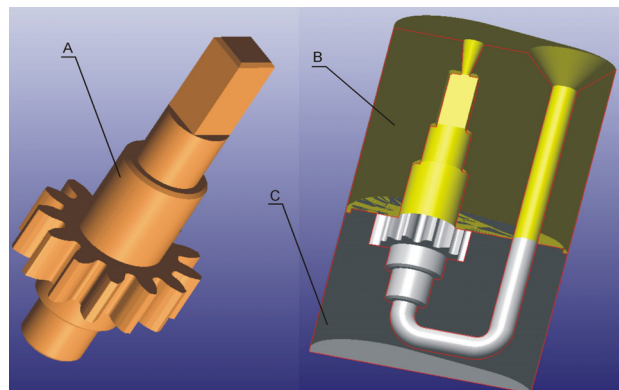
CAD model of gear wheel (A) and two part of mould model (B and C)
